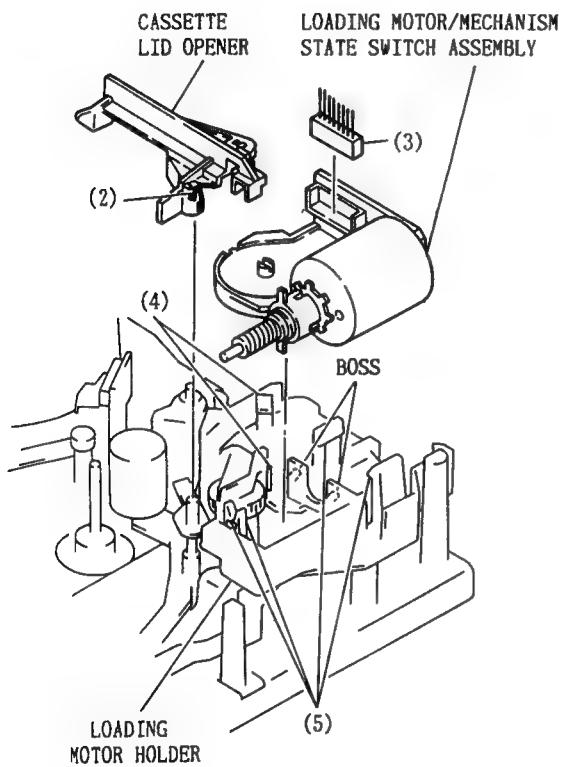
Loading Motor/Mechanism State Switch Assembly
